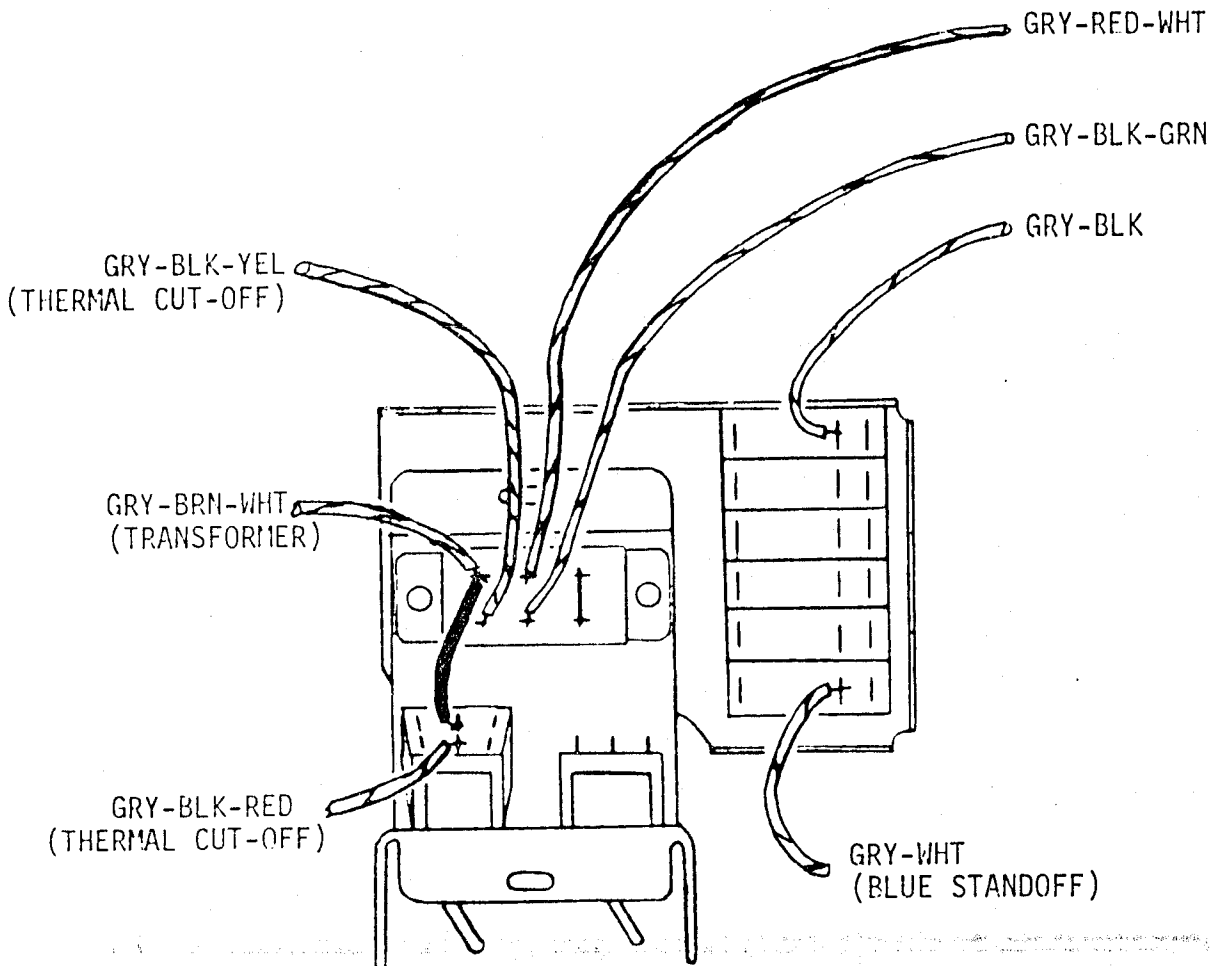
POWER ON-OFF/AC-DC MODE Switch Assembly.
